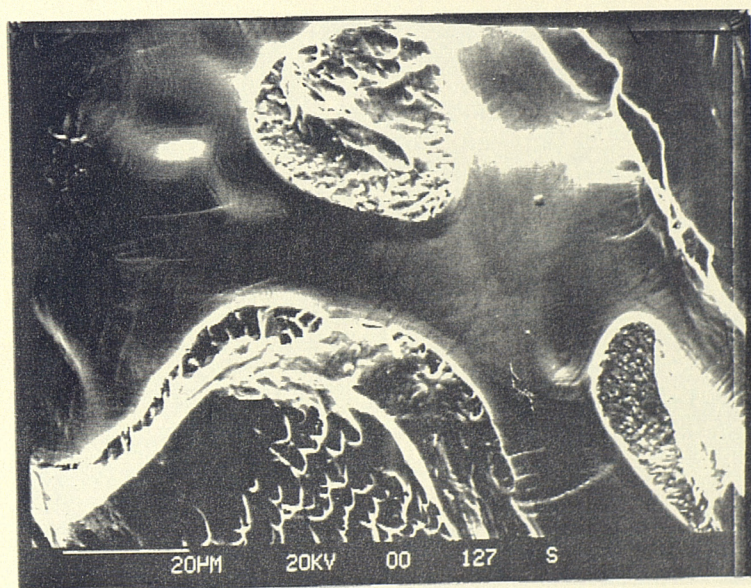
Thermally etched weld induced crack fracture surface surrounding regions of dimpled ductile rupture. x850.
